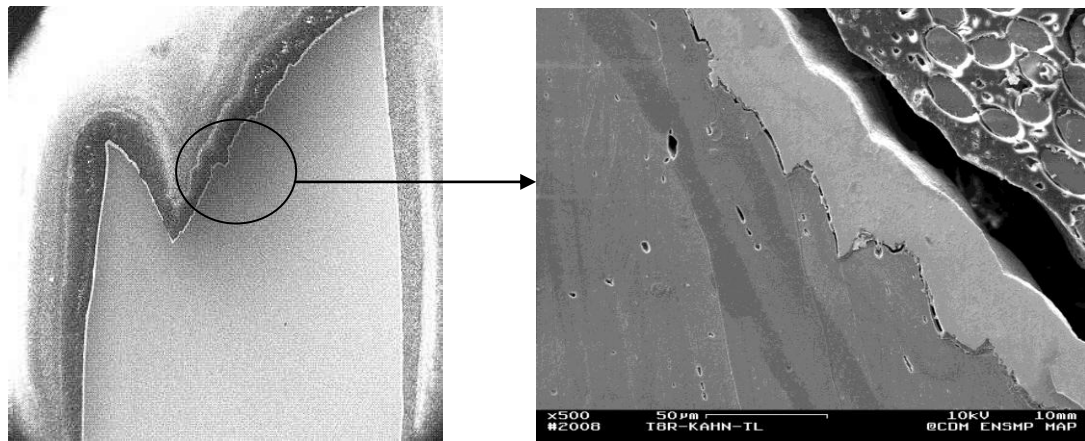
Cross section of broken Kahn fracture sample for 2198 T8F_6 sheet
